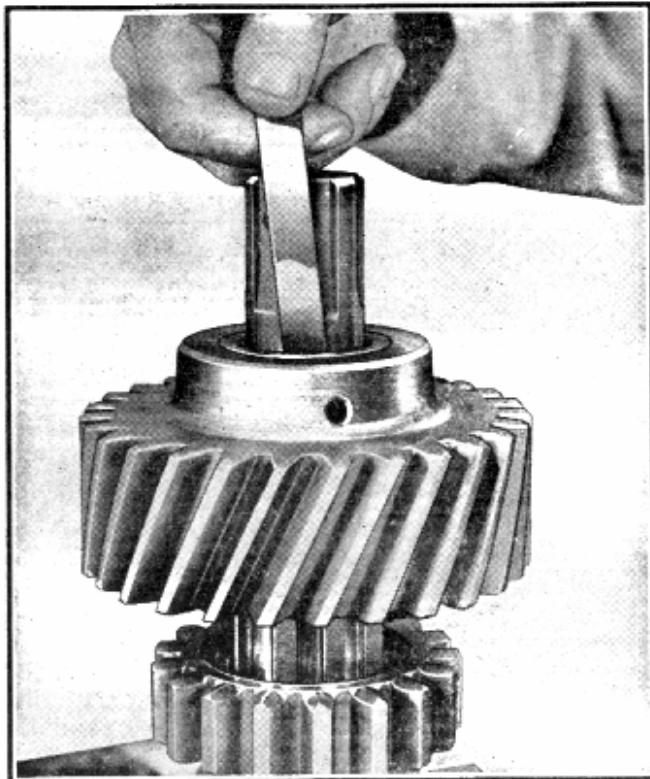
Checking Clearance of Main Drive Gear Bushing
